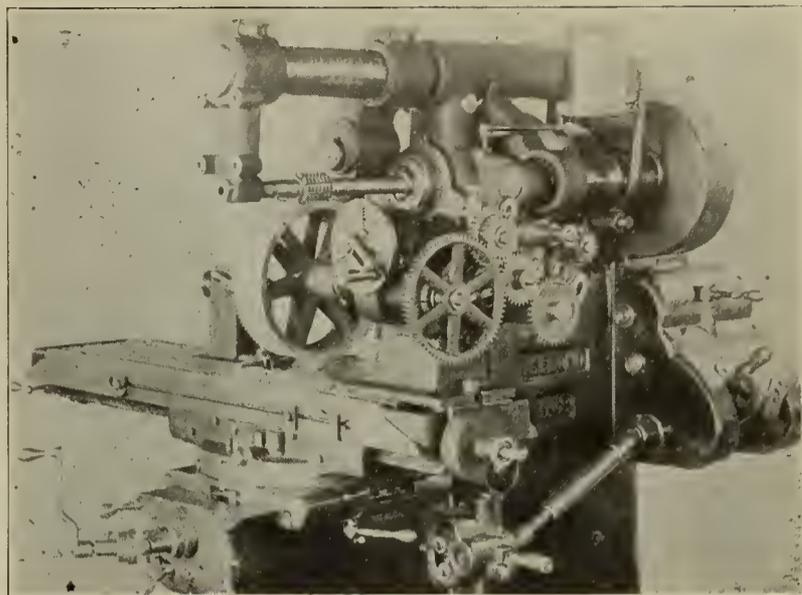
SHOWING METHOD OF CUTTING LARGE SPUR GEARS.
